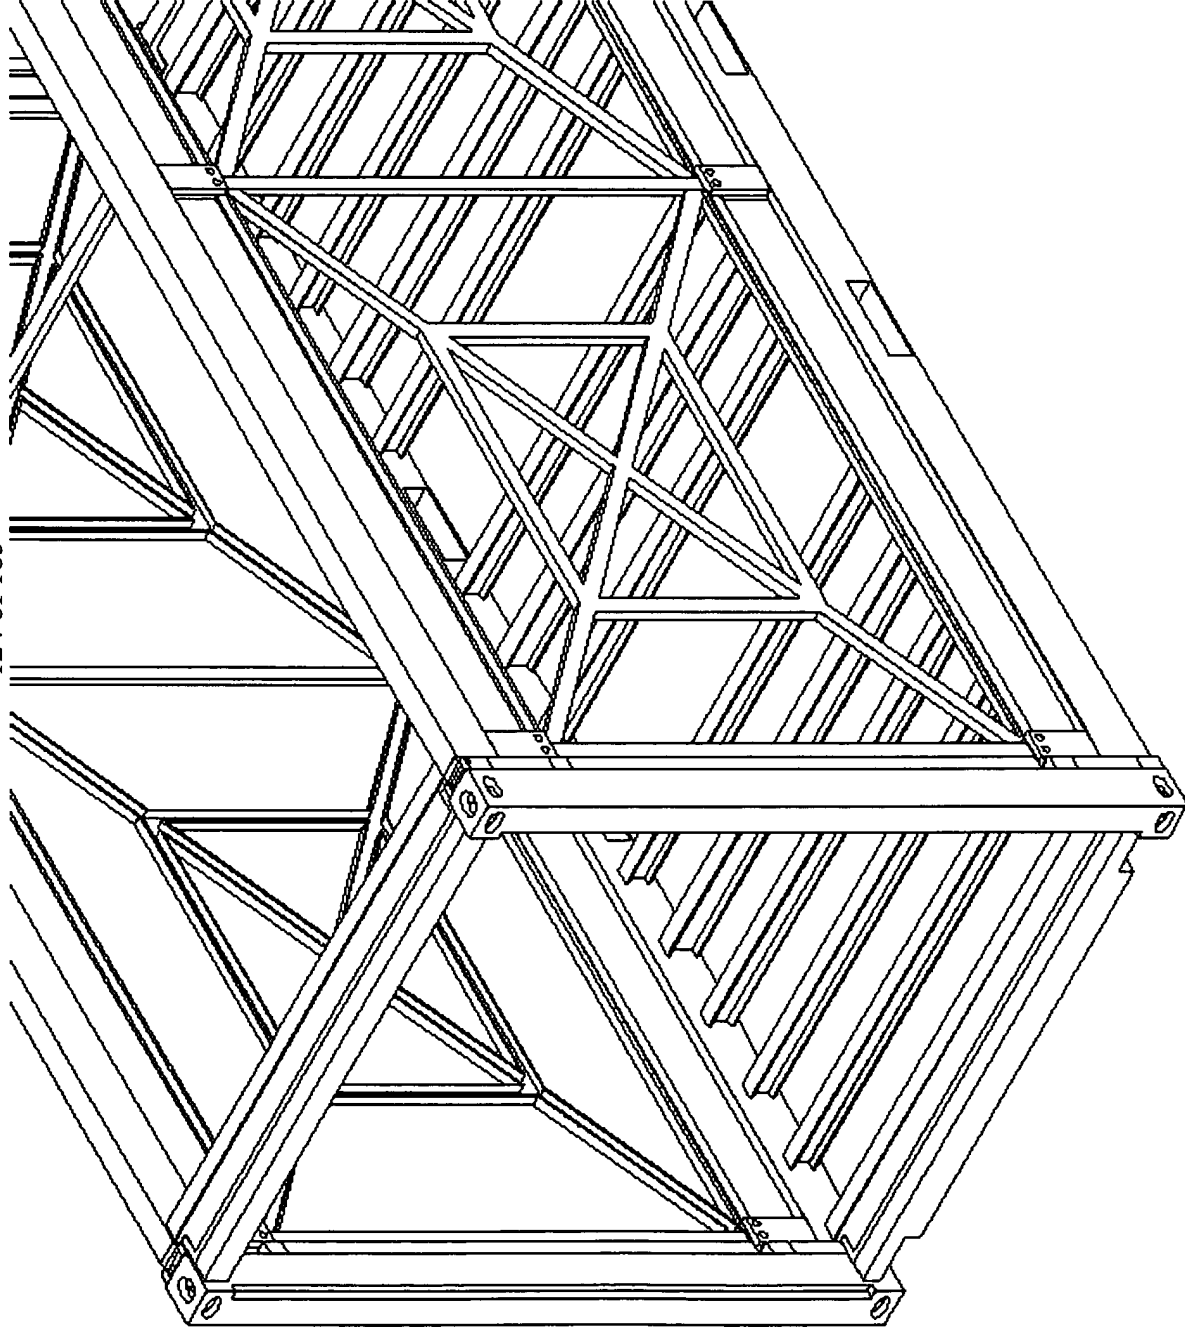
D: Enlarged isometric view of the right end of a 20 foot high cube collapsible cargo container
